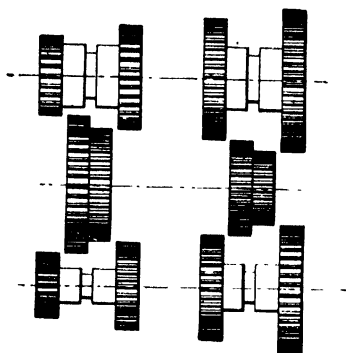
Another method of obtaining sixteen changes with sliding gears.
